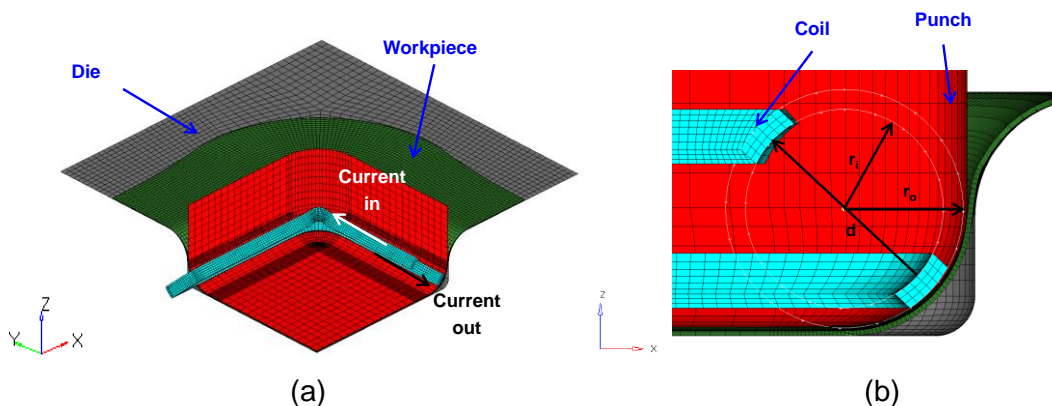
(a) Shape and location of the coil and (b) definition of the dimension of the tool coil
